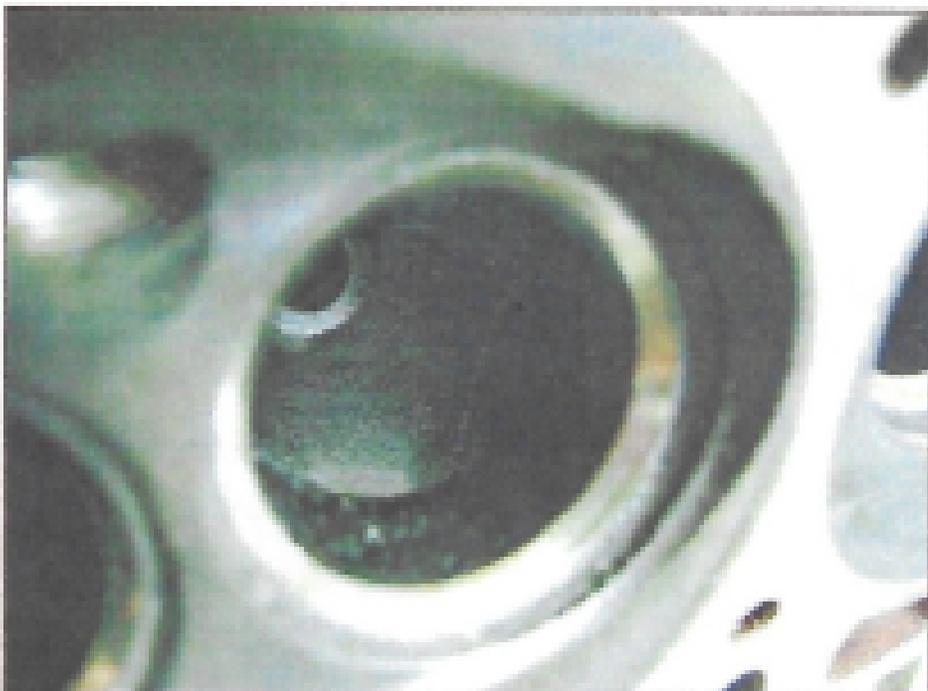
A general view of the inlet channel, the cylinder head after long-term work on petrol with drug BF1
